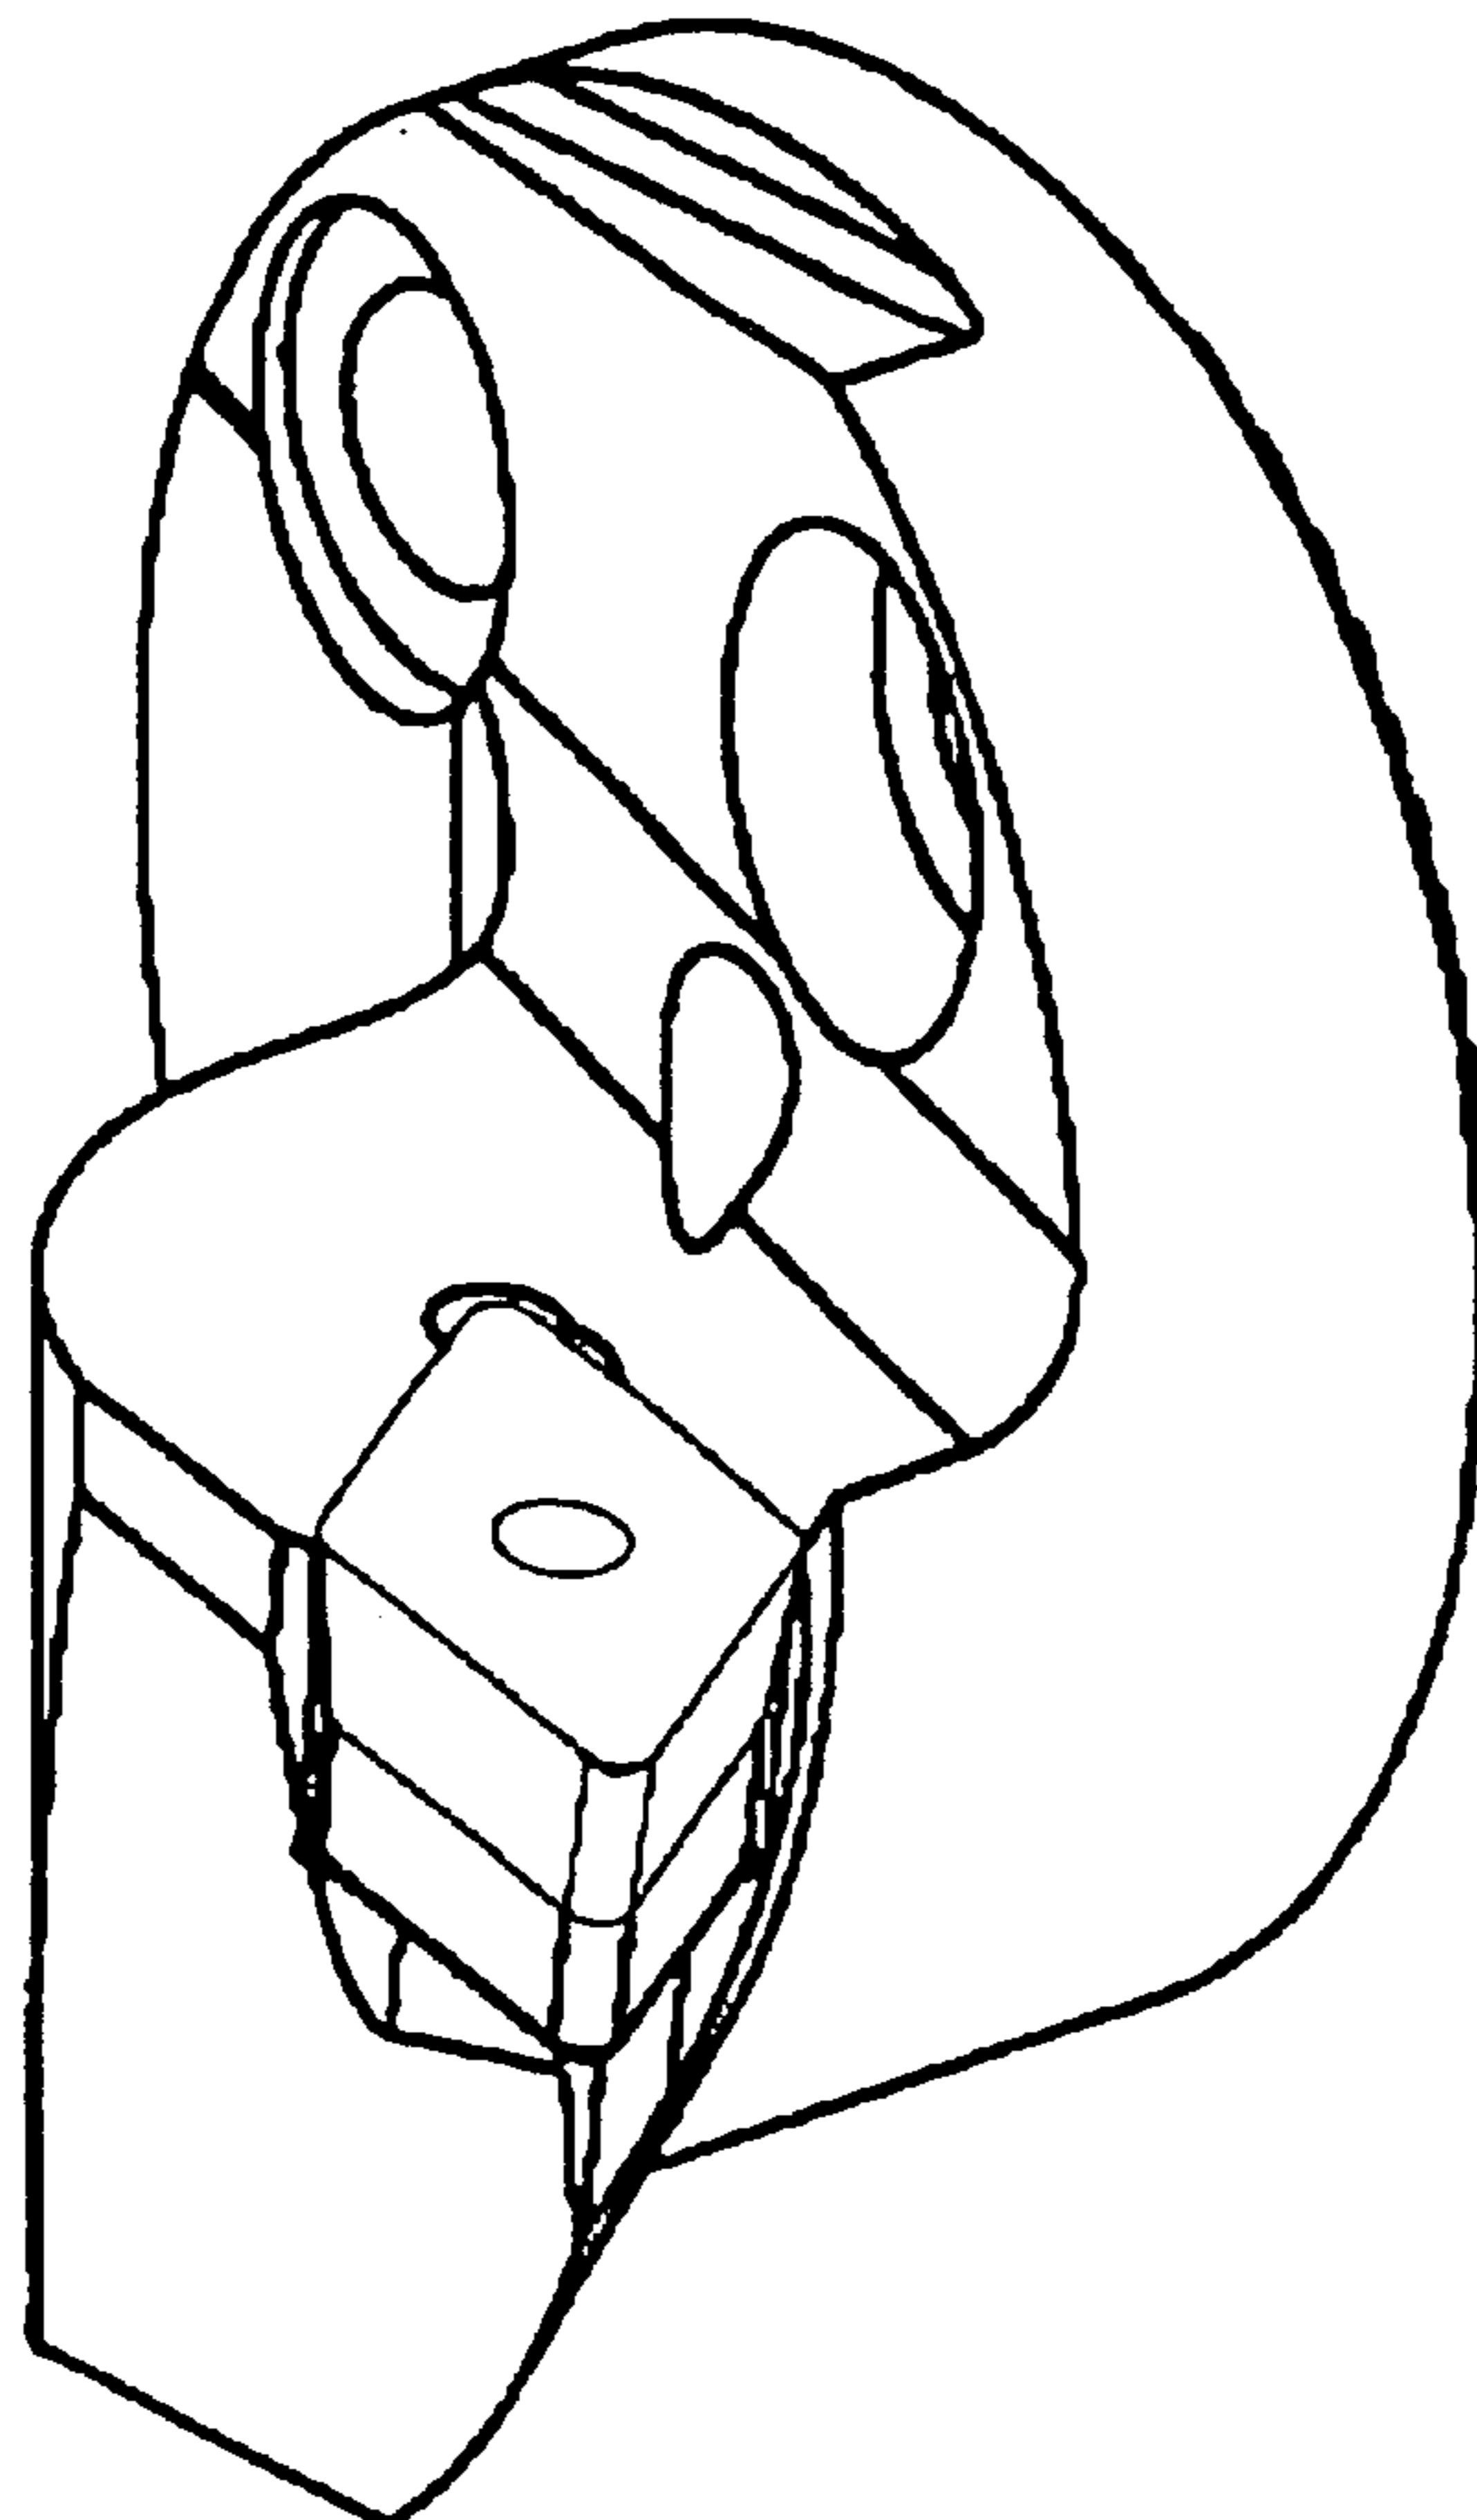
is a front perspective view of a cutting head for machine tools according to the design of the present invention.
